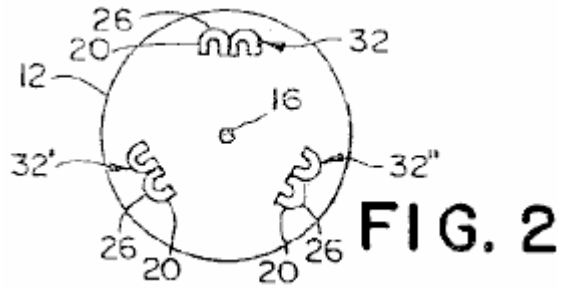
is a schematic plan view of a rotor comprising three pair of U-shaped magnets;
